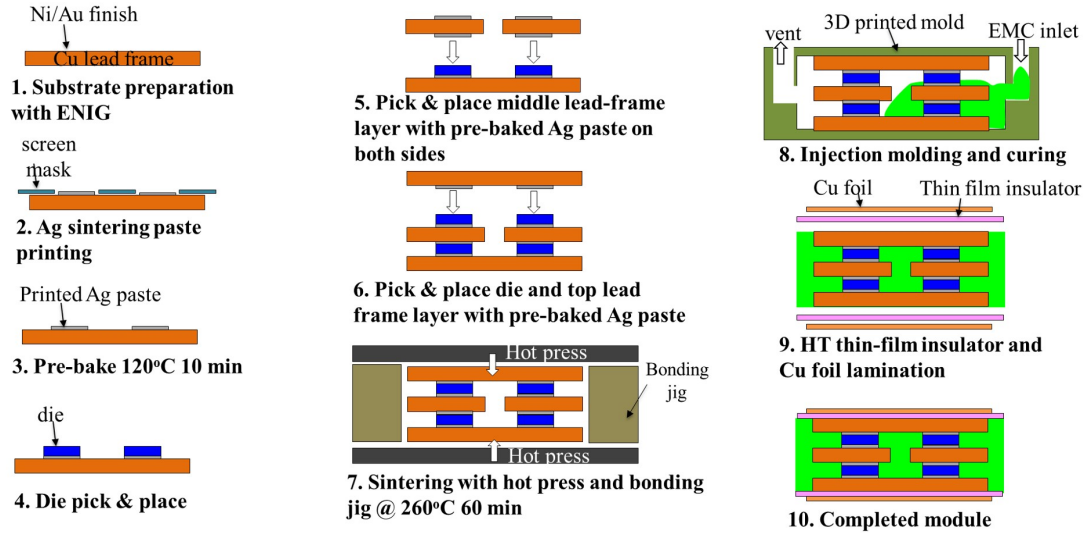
Assembly process flow for 3D power module test-vehicle
